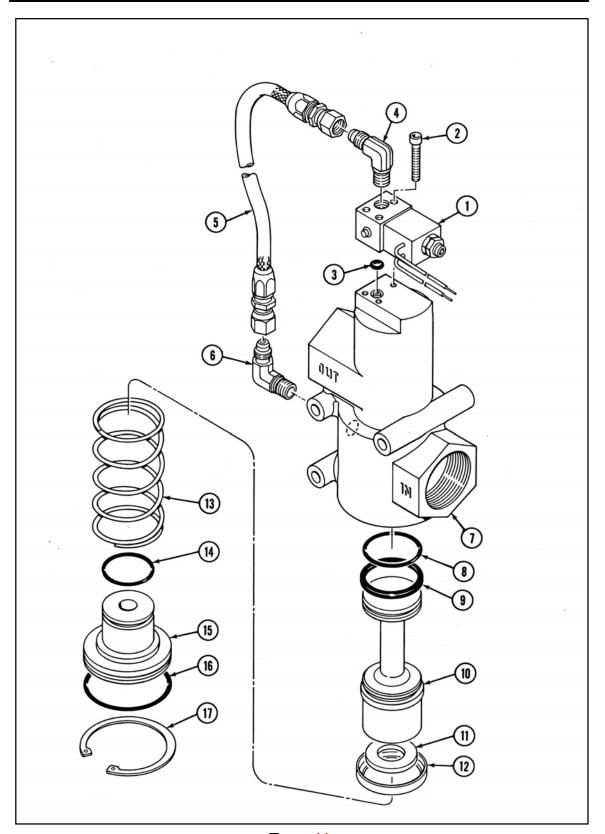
Exploded View of *TURBOVALVE* (Electrically Controlled)
